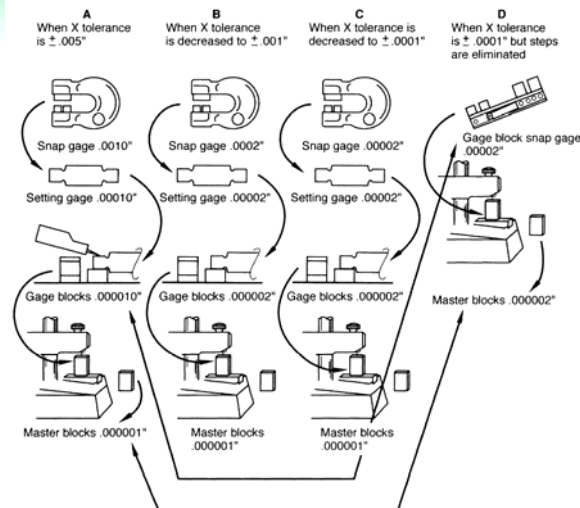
In example D, a tolerance, 1/50th as large as the one in example A, is being controlled with double the final margin of safety. This is achieved by the direct use of gage blocks for attribute gaging.
